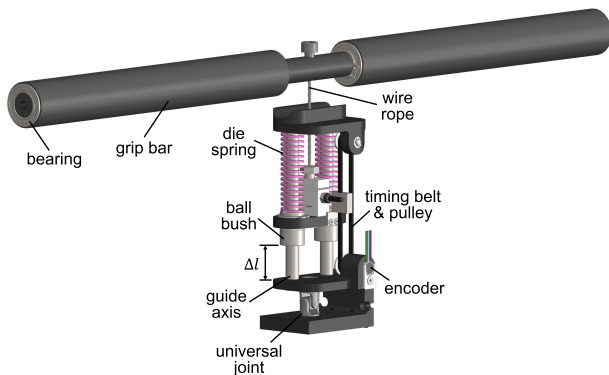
Elastic module and grip bar of robotic biceps exercise machine.
